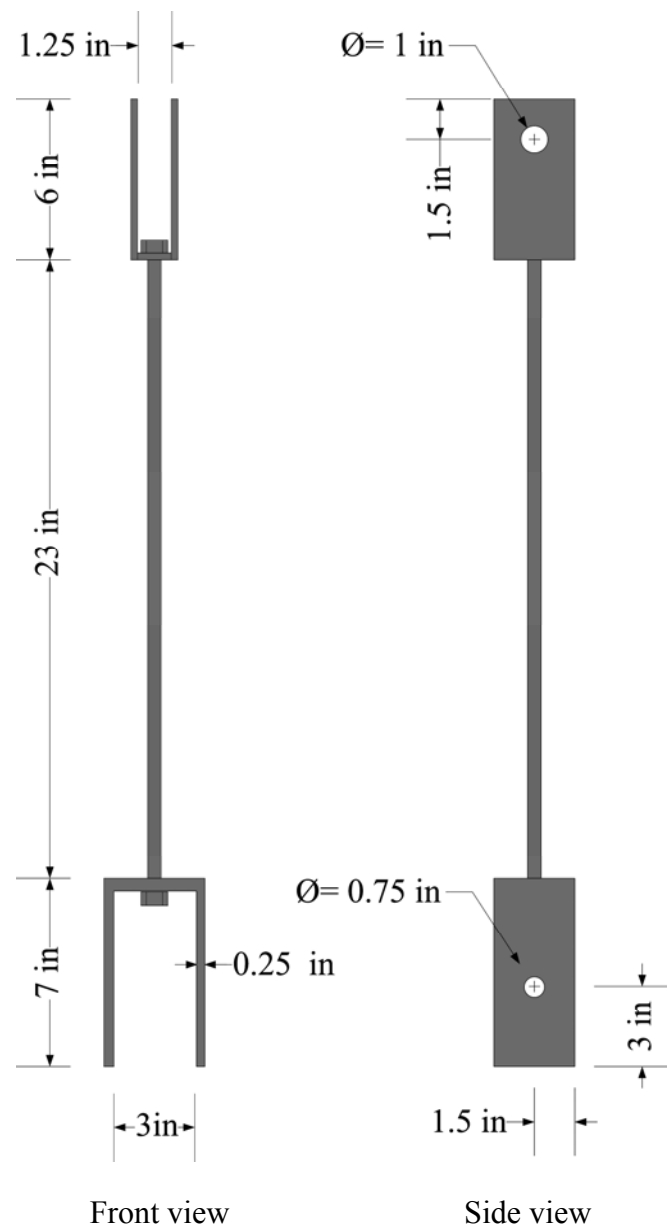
Steel rod and U-links used for connecting between cantilever beam and lower steel bar
